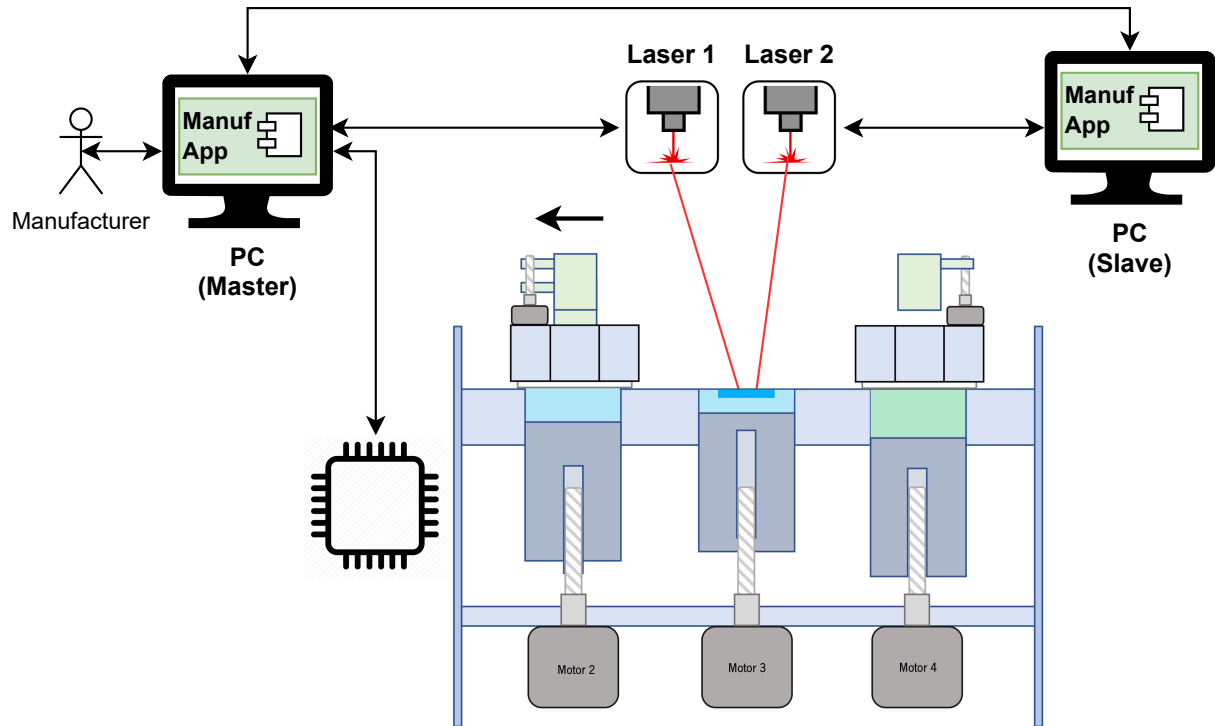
Working principle of the 3DMMLPBF machine: laser marking
